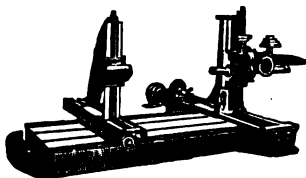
HORIZONTAL BORING AND DRILLING MACHINE.
